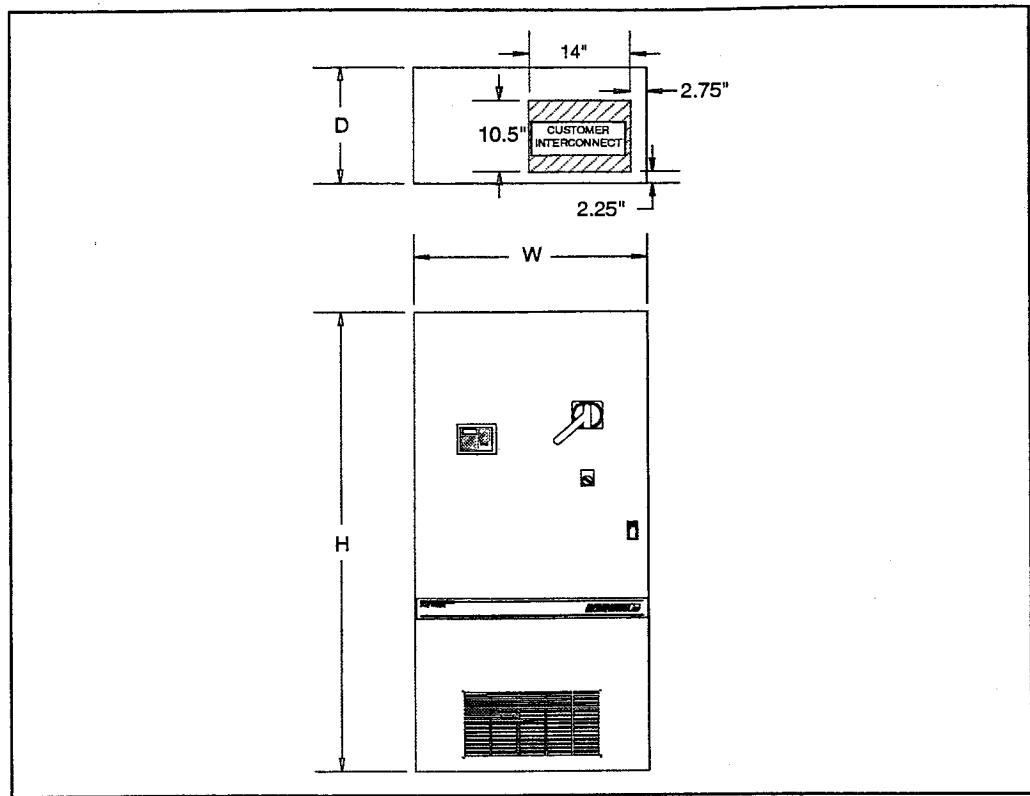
Floor Mount Option Style A Drive Dimensions (100HP @ 208VAC/75-400HP @ 460VAC)
